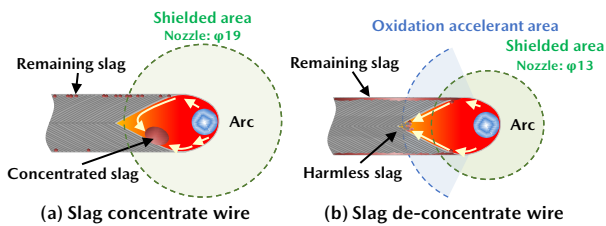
Approaches from Welding Wire for Slag Reduction
